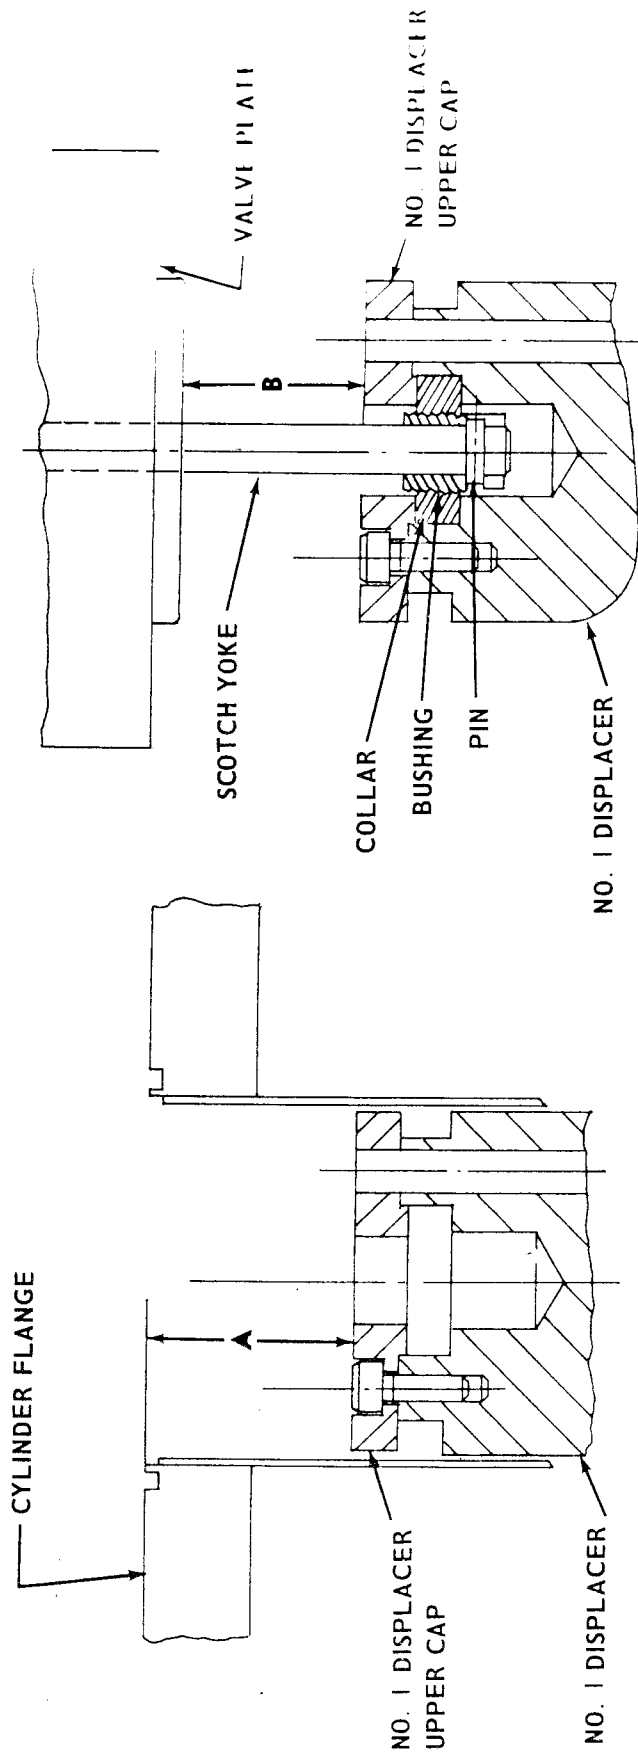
DISTANCES "A" AND "B" USED IN ADJUSTING THE DISPLACER END CLEARANCE
